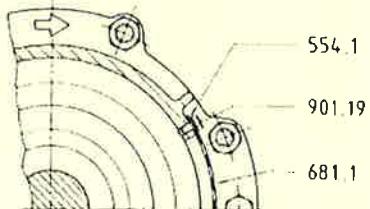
Attachment of the guard sheet to the motor bell housing
